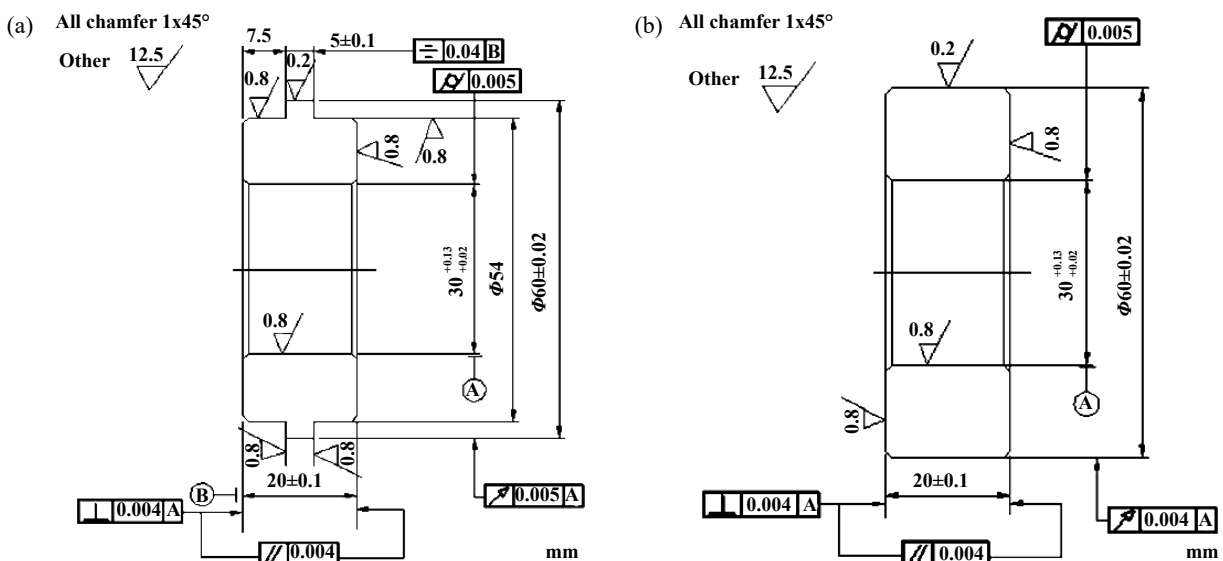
Specimen size of (a) rolling contact fatigue main sample and (b) accompanying sample
